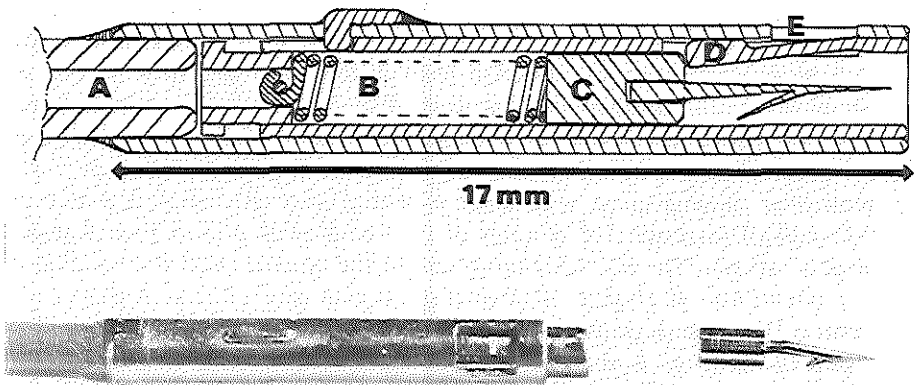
Schematic drawing and photograph of spring loaded metal marker insertion device attached to the tip of a 7 F catheter. The inner tube - including trigger lever D - is advanced by manual injection of saline into the catheter A, thus releasing metal marker C.
